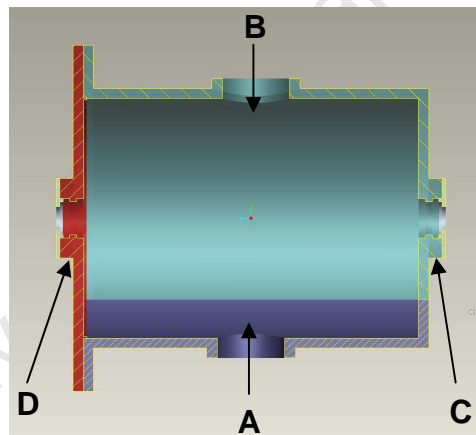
Cross-sectional view of mill chamber assembly. A - outlet opening, B - inlet opening, C - bearing shoulder (closed side of mill chamber) and D - bearing shoulder (flange).
